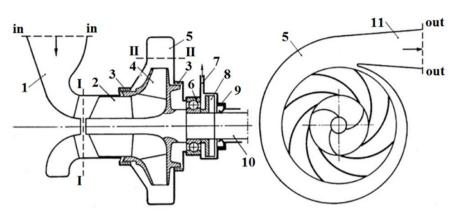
Schematic of a typical LPRE centrifugal pump: 1. Inlet, 2. Inducer, 3. Floating ring, 4. Volute, 5. Ball bearing, 7. Leakage pipe, 8. Seal disk, 9. Packing, 10. Rotor, 11. Diffuser, in: pump inlet, I-I: impeller inlet section, II-II: impeller outlet section, out: pump outlet.
